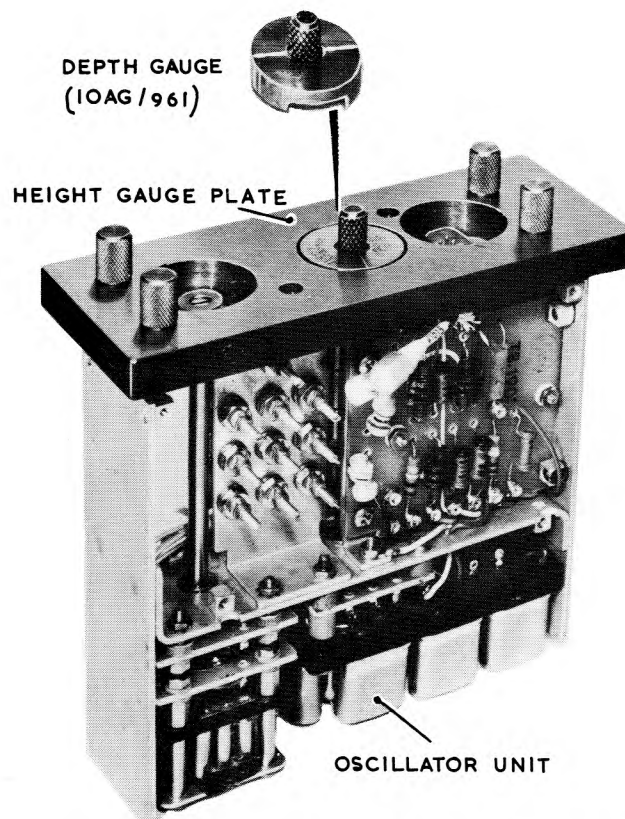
Height gauge plate Ref. No. IOAG/960 in position
